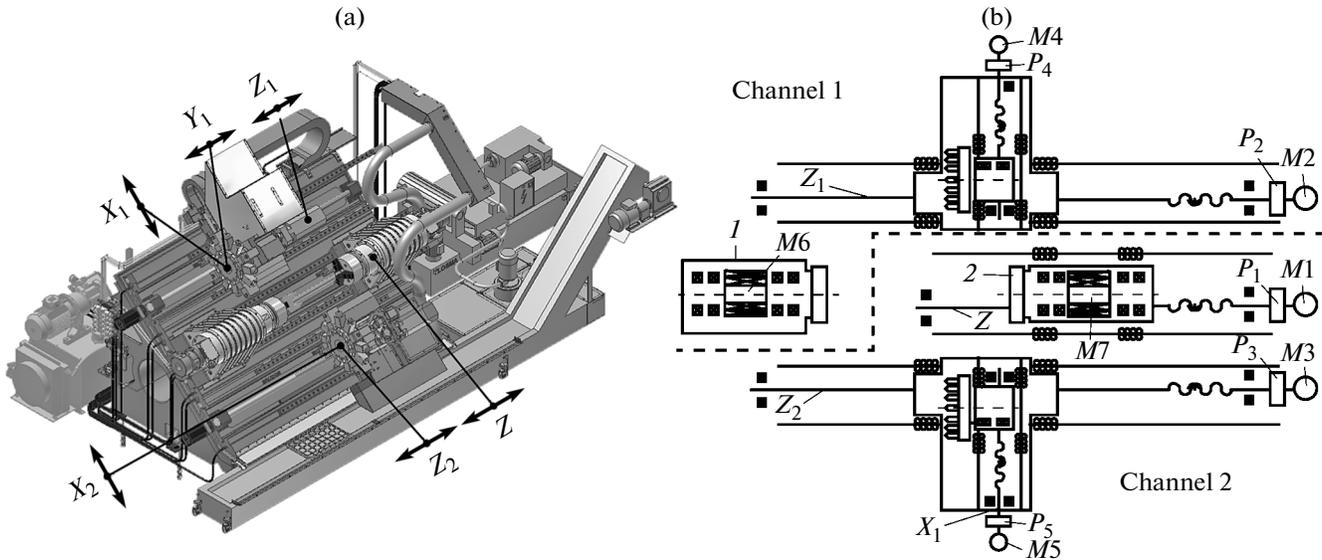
Inclined NAKLON 535 turning and milling center: (a) general view; (b) kinematic system; (1) primary drive; (2) counterspindle.
